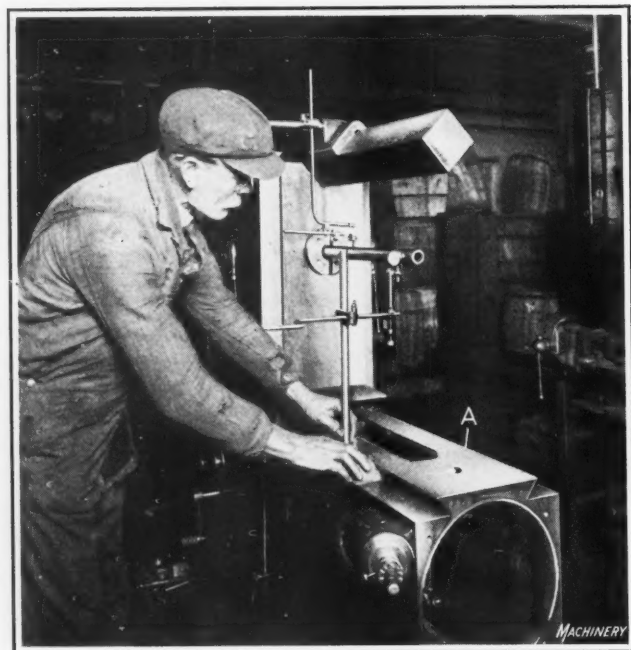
Test Bar and Indicators used in testing the Spindle Bearings and the Over-arm Bearings in Relation to the Knee Bearings
